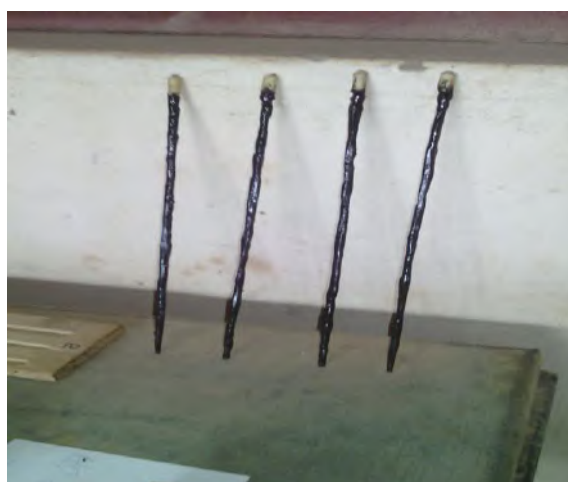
Plate V: Produced welding electrodes prior to curing in the oven
